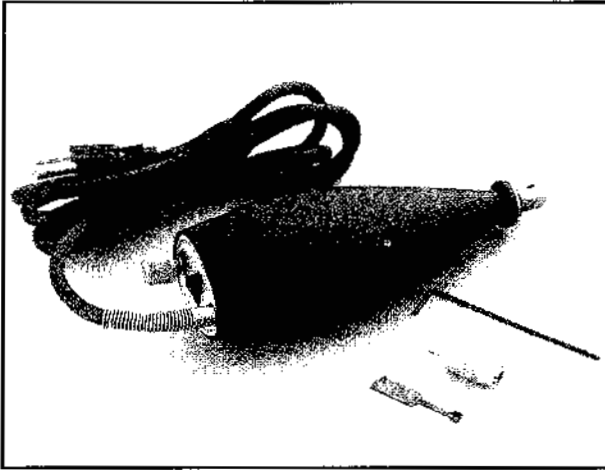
A hand-held or stationary vibrating tool can be used to remove lead deposits.
